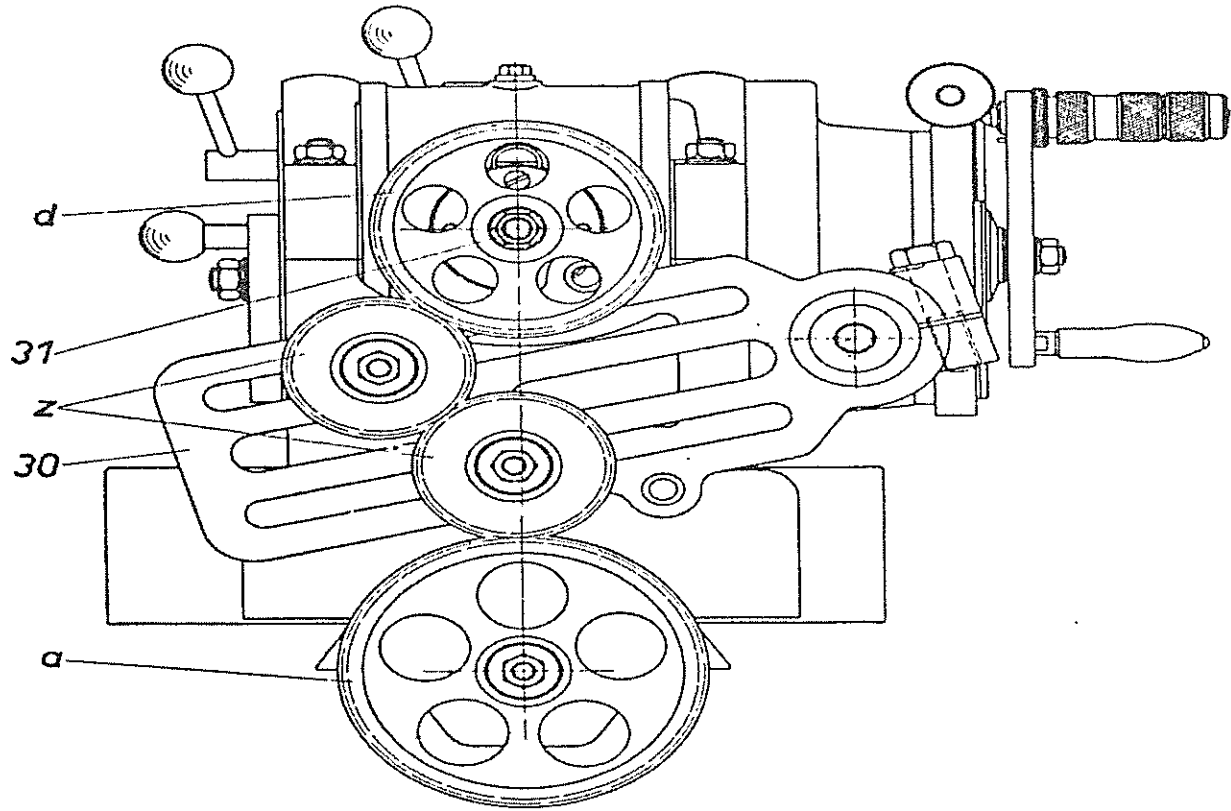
Change gears in spiral milling with direct drive of the part spindle (single gear ratio with 2 intermediate gears)
